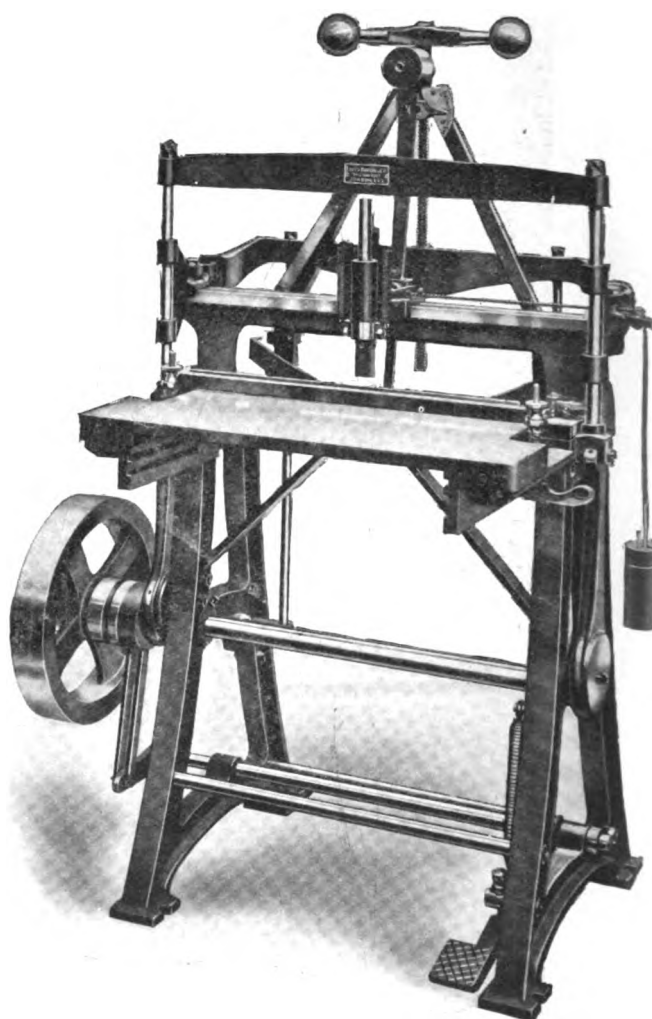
IMPROVED INDEX CUTTING MACHINE WITH BALL LEVER ADJUSTMENT
